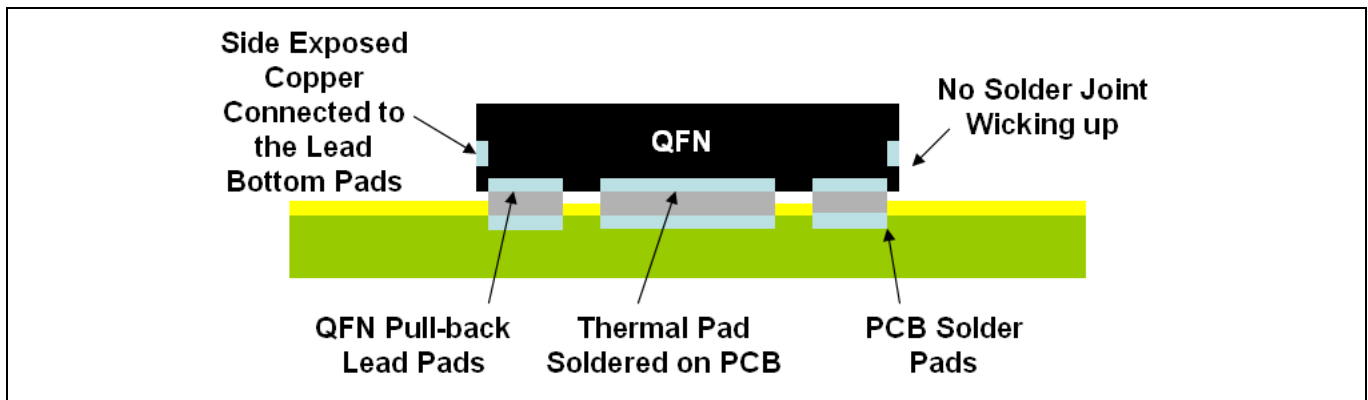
Cross-section view of solder joint on the QFN with pull-back design
